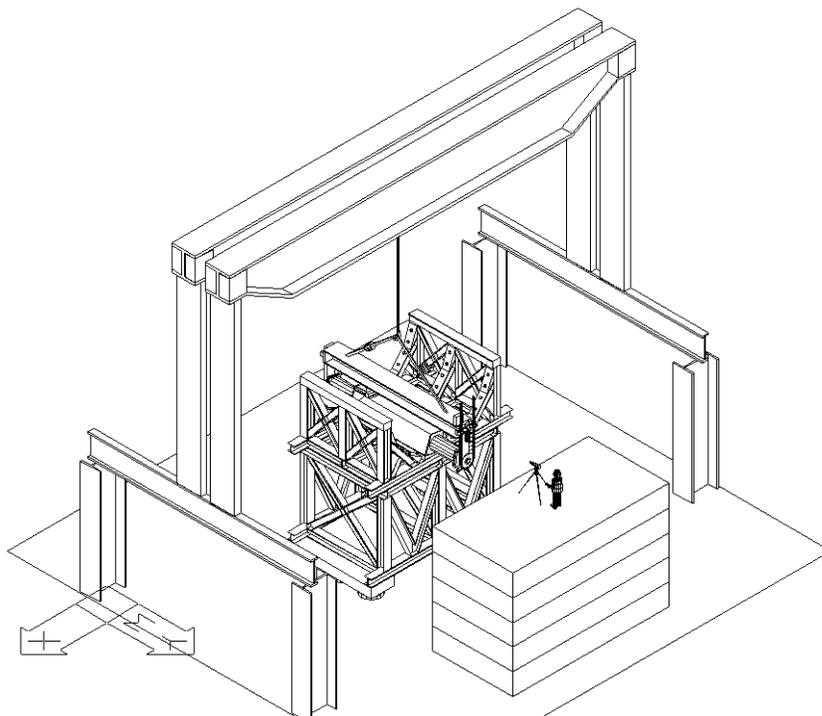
MS HCAL barrel assembly / installation step 2.
